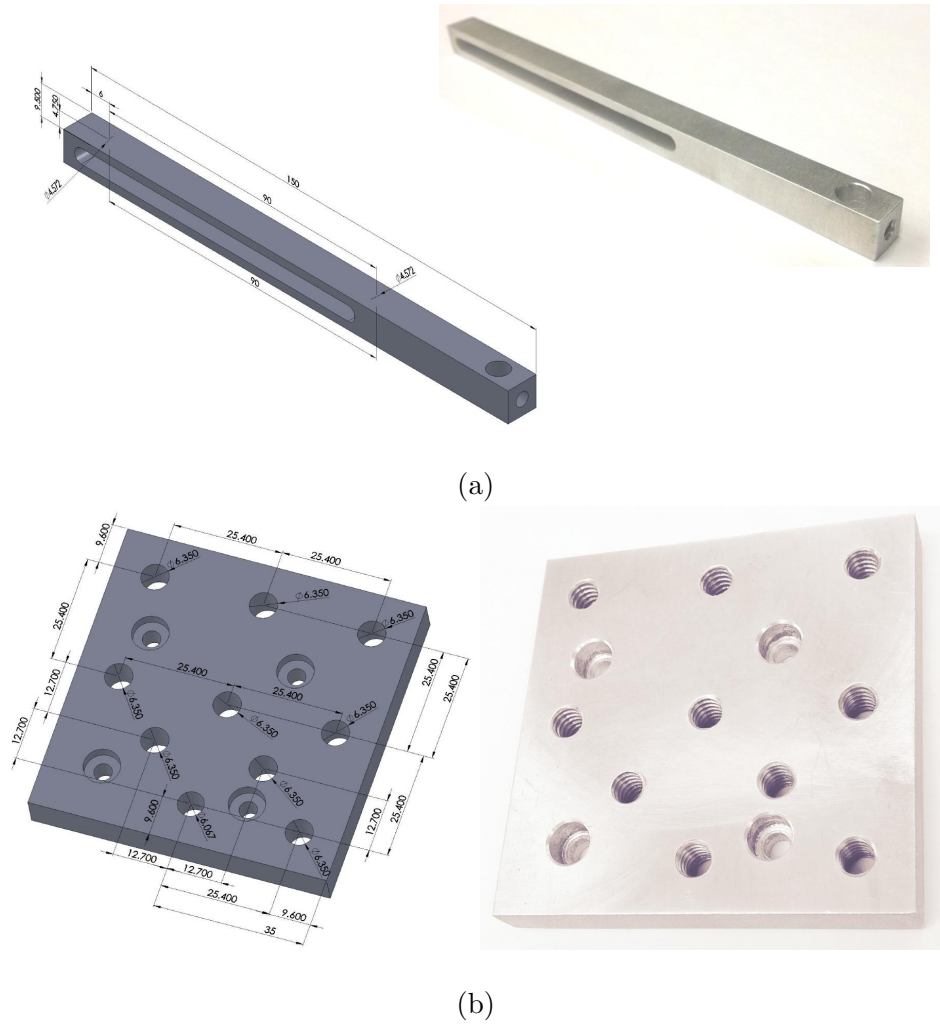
Custom-designed mechanical components: (a) 3D CAD model and manufactured arm; (b) 3D CAD model and manufactured adapter plate.
